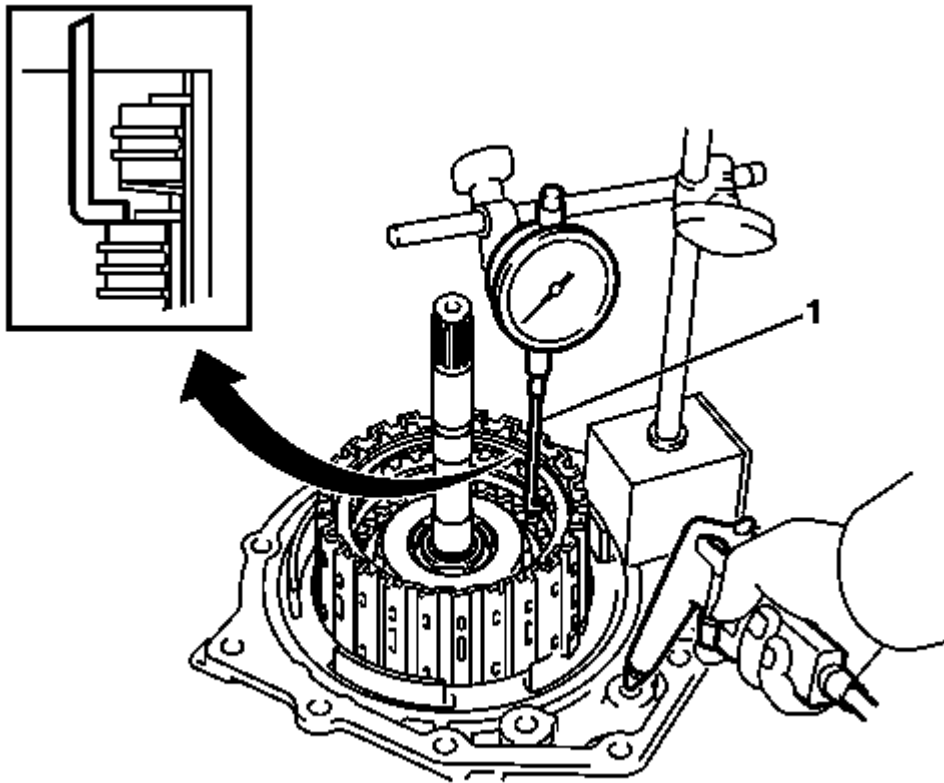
Identifying DT-- 47520 Measuring Terminal
